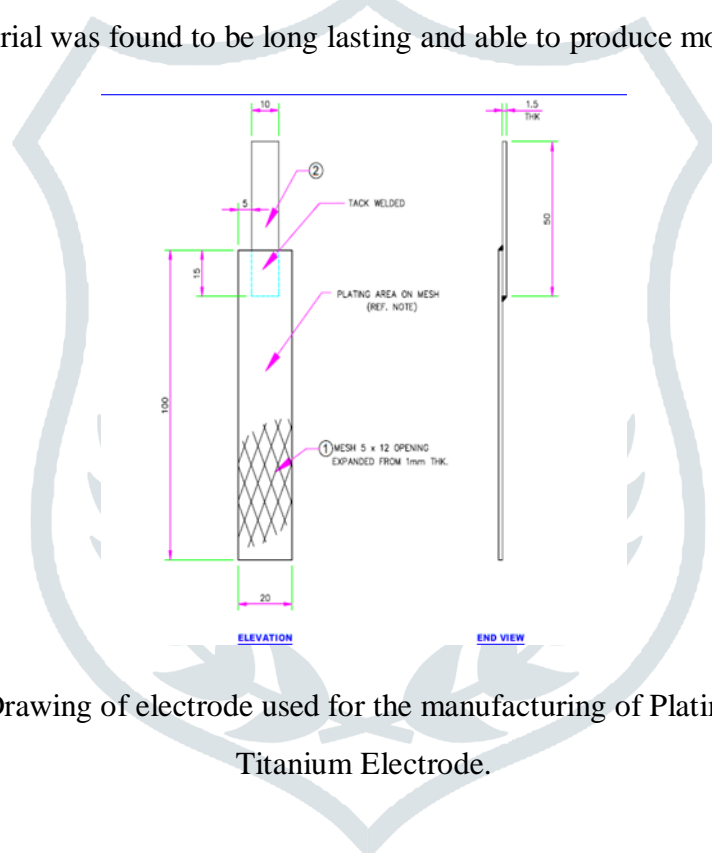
Drawing of electrode used for the manufacturing of Platinum coated Titanium Electrode.
